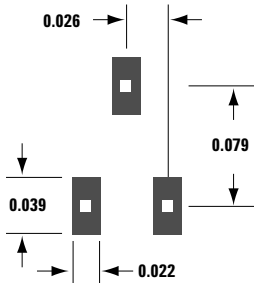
Recommended PCB Pad Layout for Avago Technologies' SC70 3L / SOT-323 Products.
